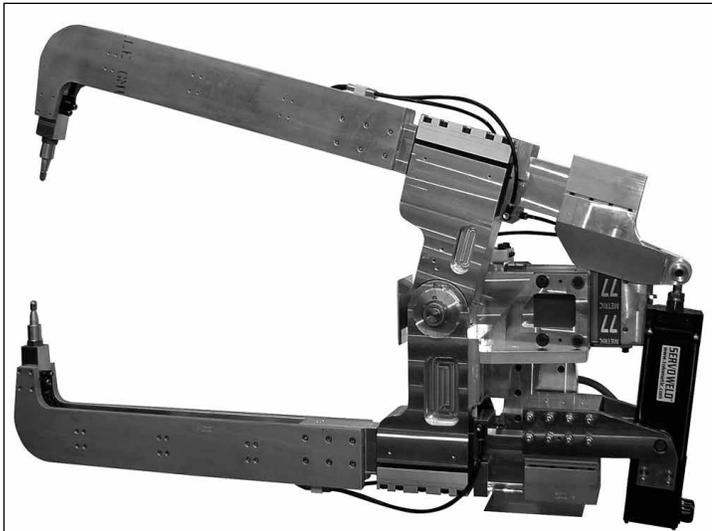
Example of ServoWeld™ welding actuator (GSWA04) installed on “X” Style weld gun unit.
